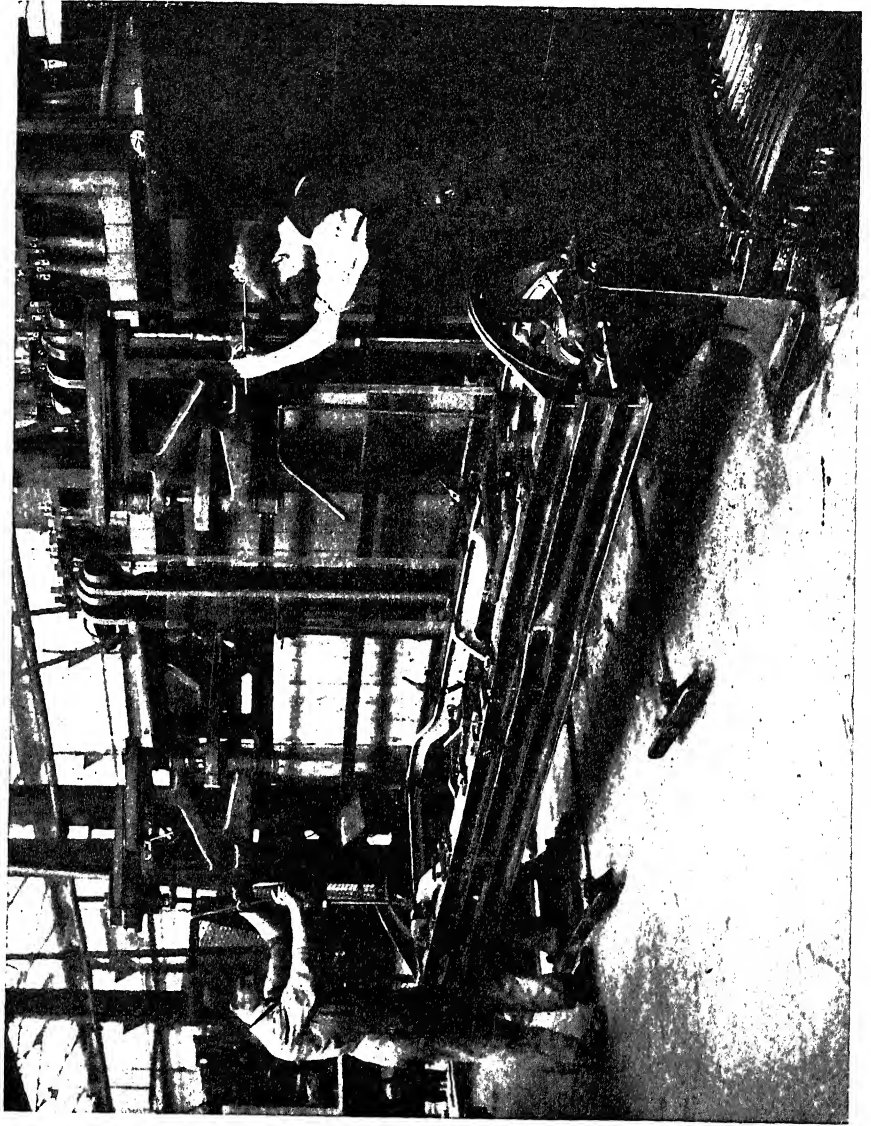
An Assembled Frame being Drilled in a Jig Fixture
